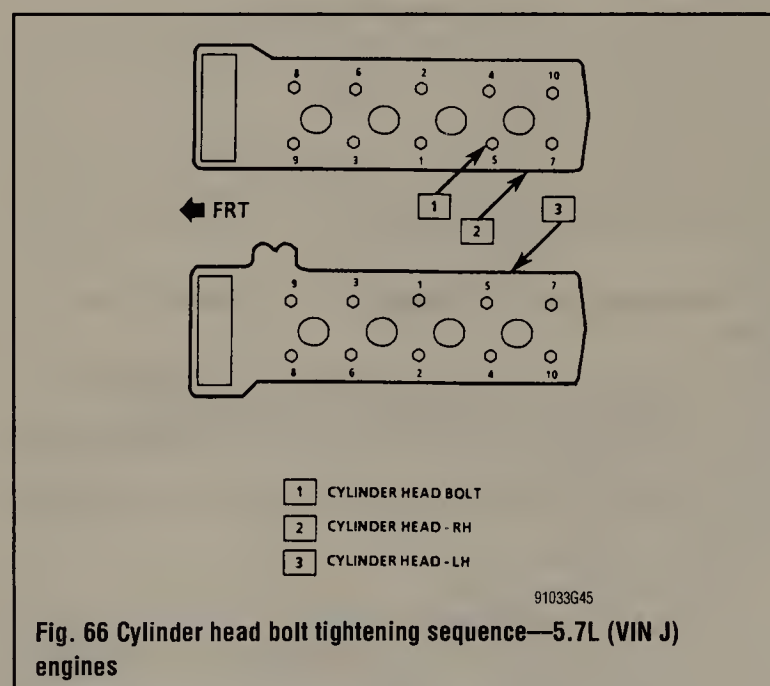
Cylinder head bolt tightening sequence—5.7L (VIN J) engines
